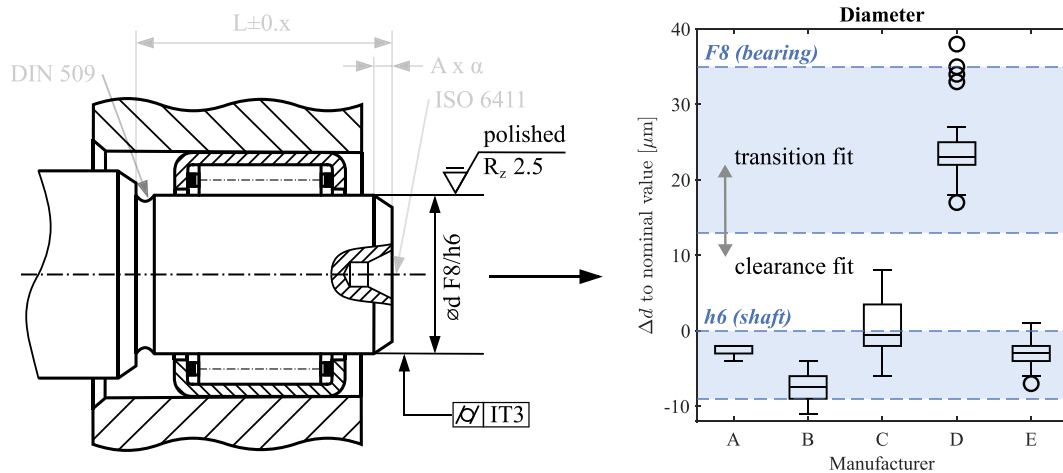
Technical drawing of the spindle-bearing interface (left) and diameter measurements from five manufacturers A–E (right). Based on ISO 3245, relevant embodiment characteristics are extracted, with the measurements highlighting manufacturer-specific fit strategies.
